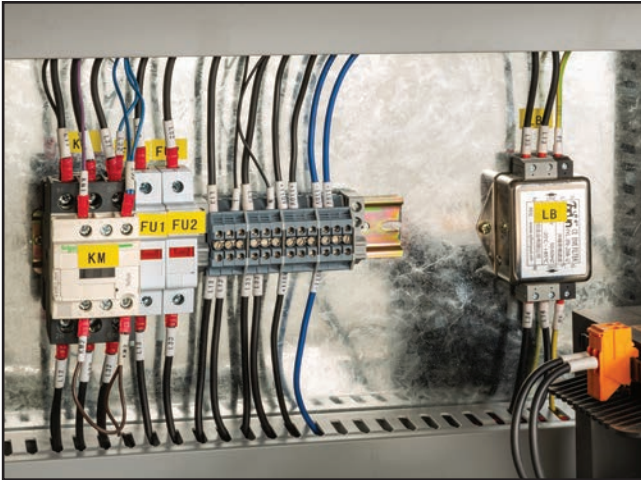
Contactor, fuse holders, terminal blocks, and EMI filter.
